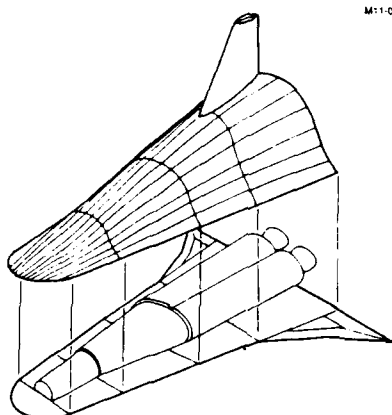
EXPLODED VIEW OF TYPICAL PACKAGING ARRANGEMENT
